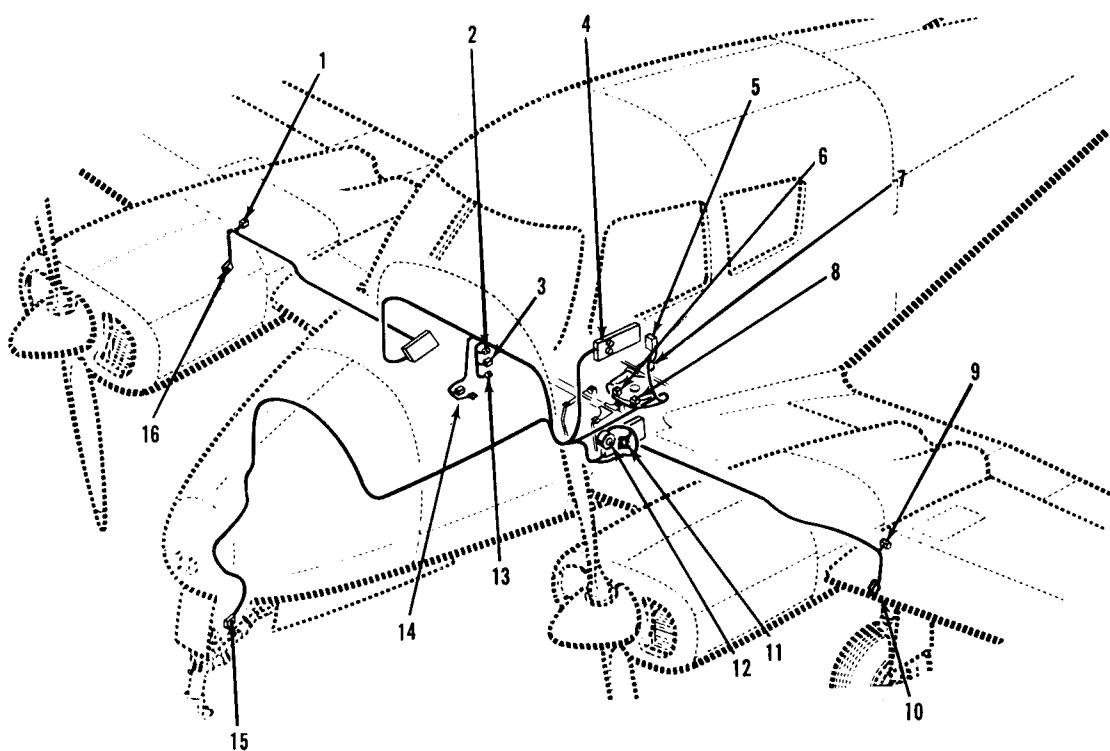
Landing Gear Circuit(Sheet 1 of 6)
